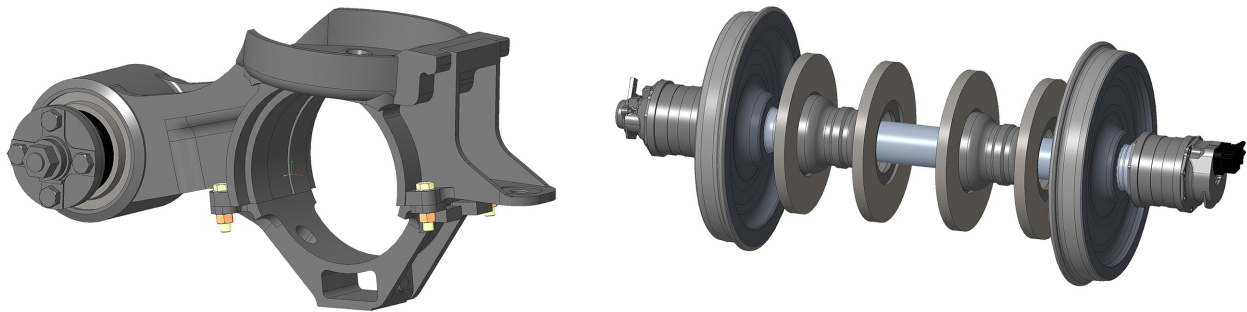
Detail of the axle box (left) and the wheelset (right) assemblies.
